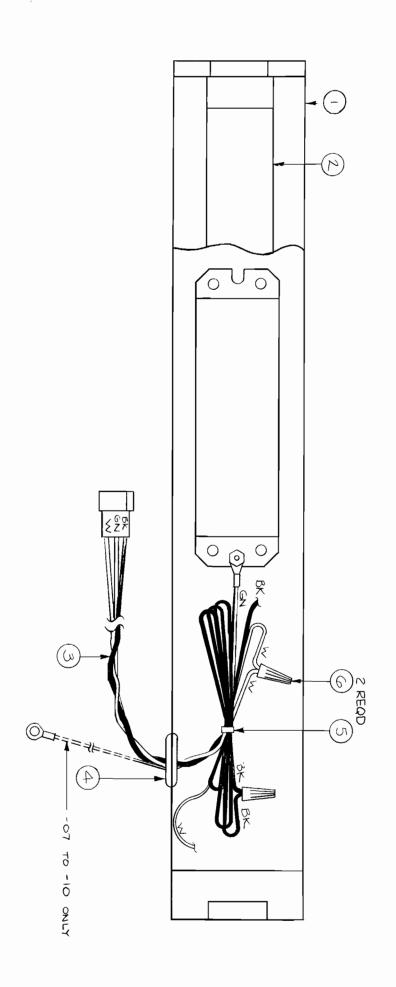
Type A Fluorescent Light Assembly Parts List
